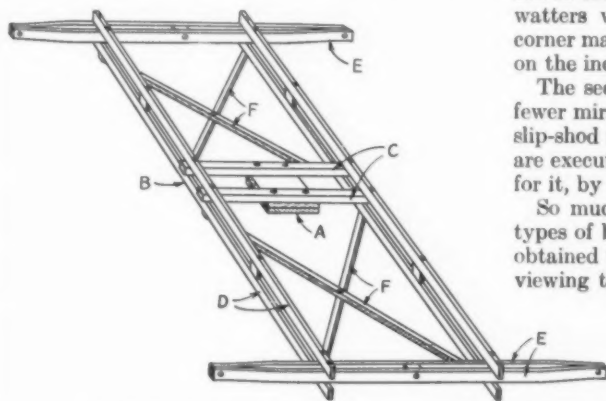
MECHANICAL DETAILS OF THE SUPPORTING STRUCTURE
